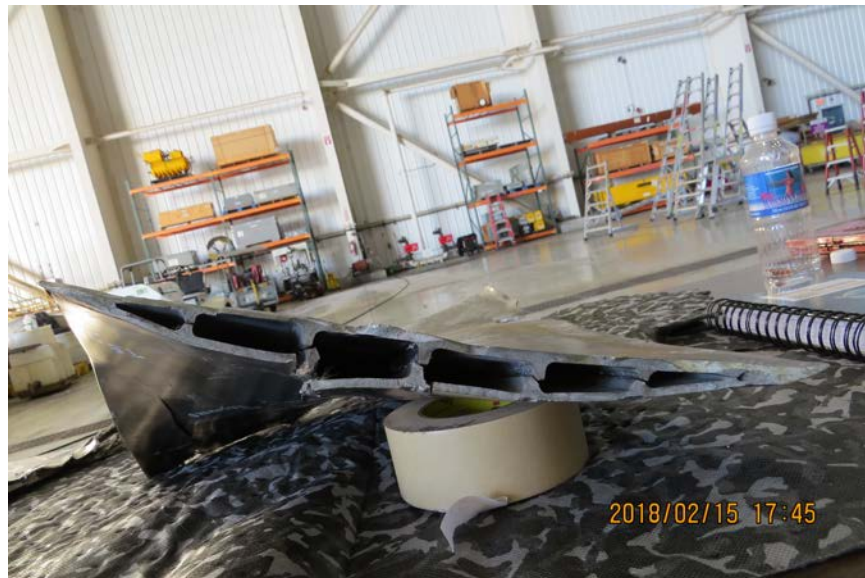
View of fracture surface on fragment from fan blade No. 11 showing how it corresponded to fracture surface on inboard end of blade. (P&W)
